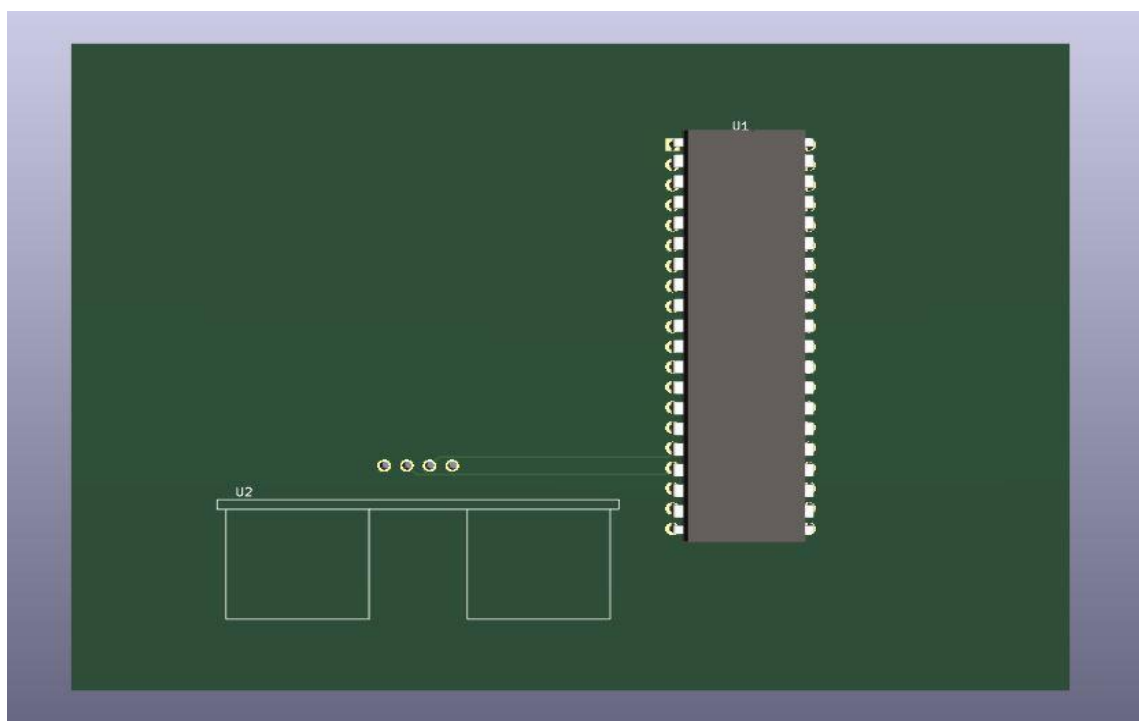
Component View of HC-SR04 Ultrasonic Sensor PCB Design
